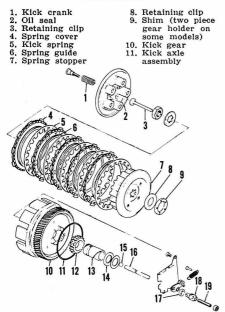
Exploded view of typical clutch assembly. 11. "O" ring
